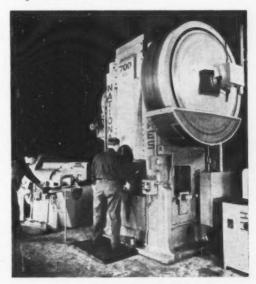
A Maxipres 700-ton Forging Press and a No. 4 Size Reduceroll\*Roll Forging Machine
